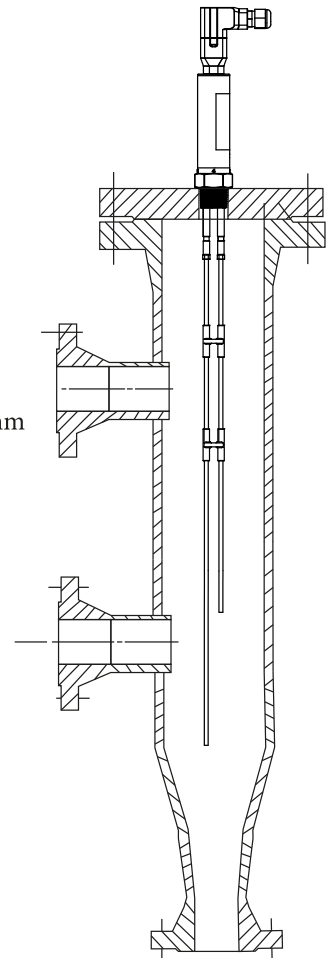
Installation example 3, usage with protection tube outside the boiler.
